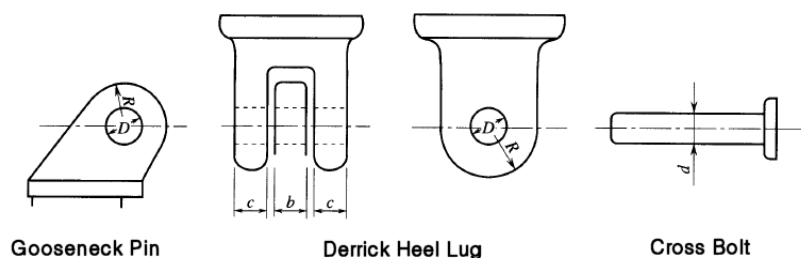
Gooseneck Pin, Derrick Heel Lug and Cross Bolt
